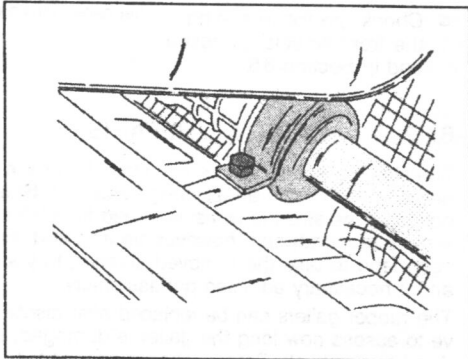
The steering is secured with mounting clamps on both sides. A similar attachment is on the other side.
